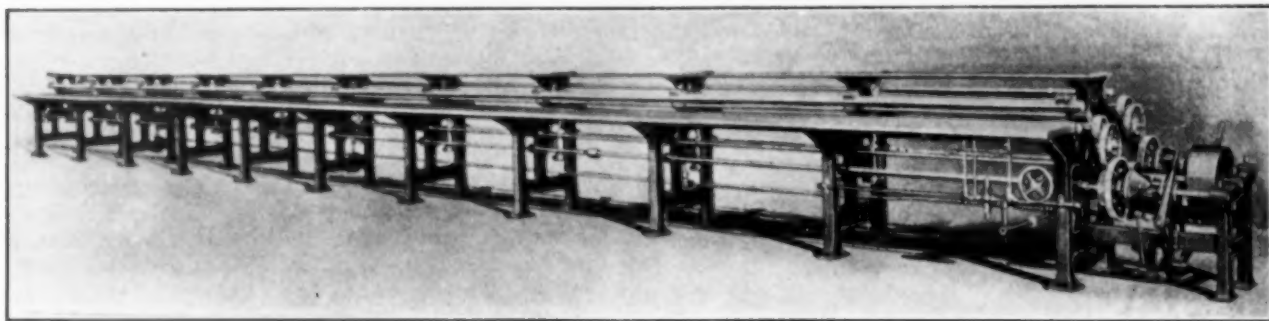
52-FT. COMBINATION HOSE-MAKING AND WRAPPING MACHINE
